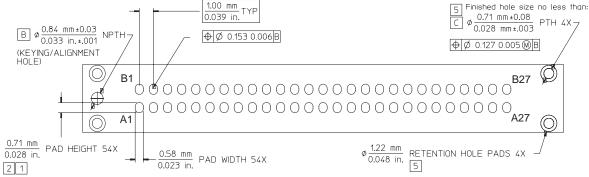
U4206A Top view footprint dimensions (drawing notes below).
